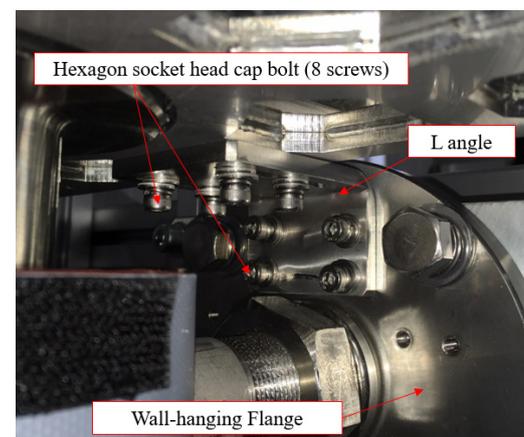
Remove the hexagonal socket head bolt (M5, 8) fastening the L angle.
